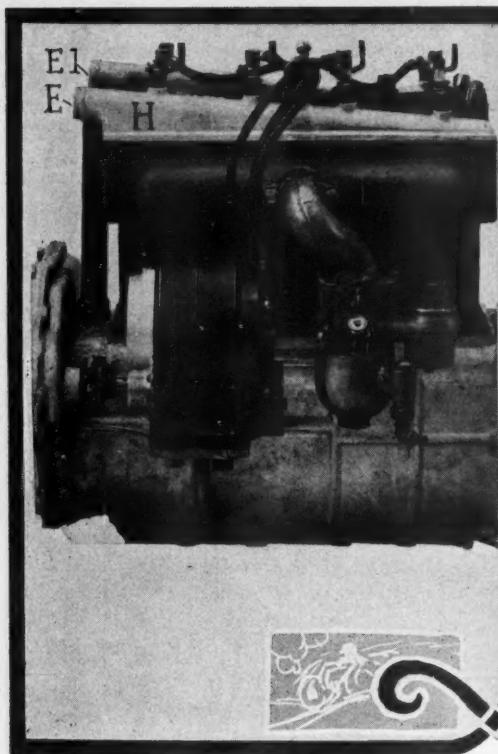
INTAKE SIDE EMPIRE TWENTY MOTOR
